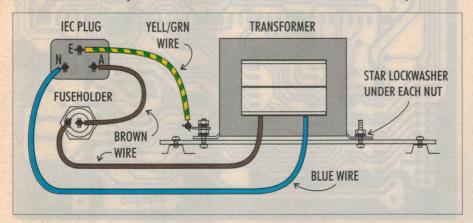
How the mains transformer is mounted on its plate, how the protective earth is connected, and details of the mains wiring. All mains connections should be covered using heatshrink or varnished cambric sleeving, for safety.
